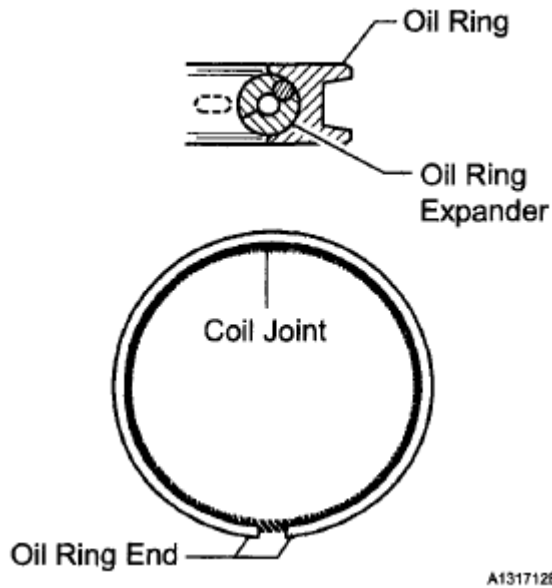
Identifying Oil Ring Ends And Coil Joint
